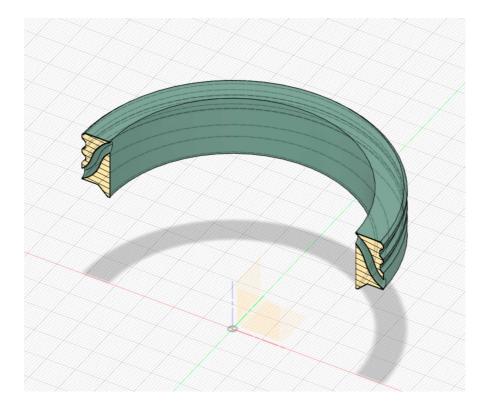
Cross-section of the Ring in Fusion360, showing the two serpentine channels for inserting the polyethylene tubing through the Ring wall into the blood cell. Two grooves on the outside are for O-rings that hold the feeding membrane in place.
